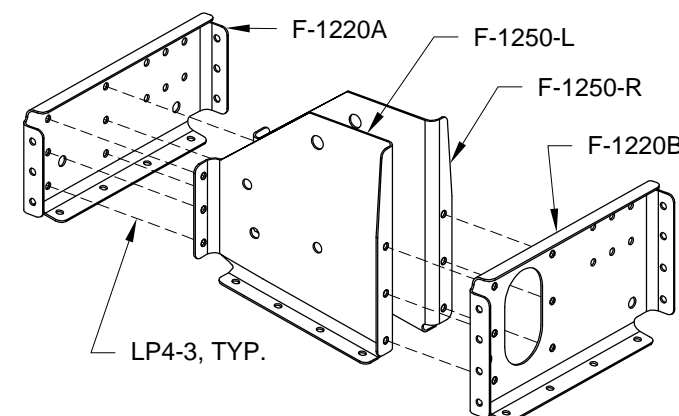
RIVETING PULLEY BRACKET ASSY
